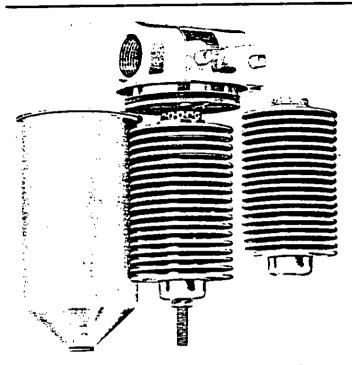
Compressor Lubricating Oil Filter, showing a dirty filtering element removed and replaced with one which has been cleaned.
